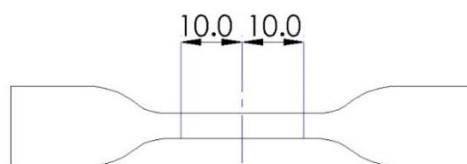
Gauge length in mm of the dumb-bells specimen.
